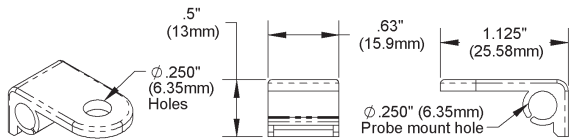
Flexible Probe Bracket Break-Off Tab Dimensions and Mounting of Remote Probe
